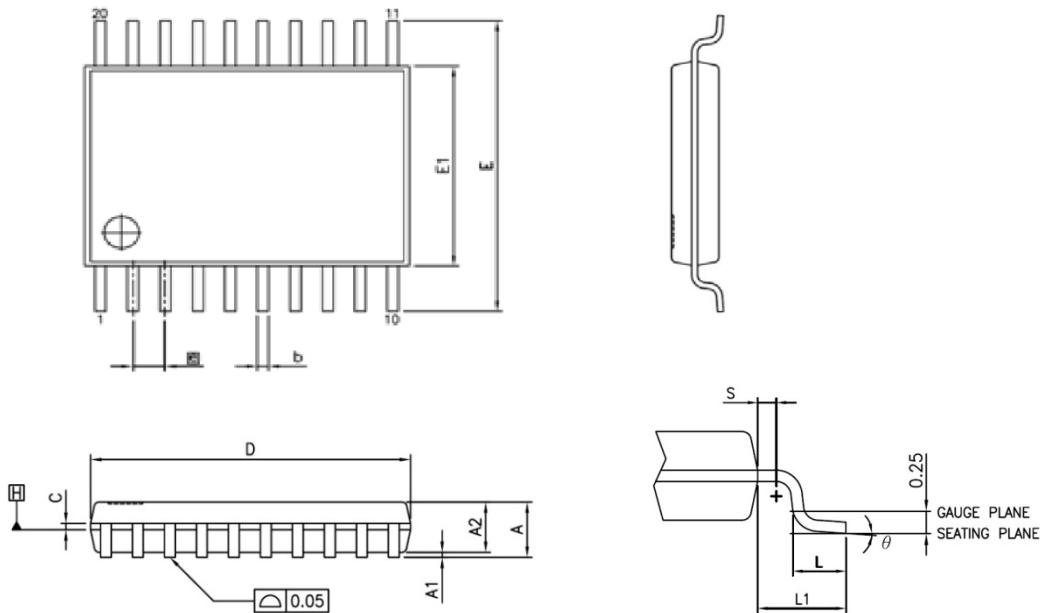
SSOP-20 (150 mil) Package Dimension
